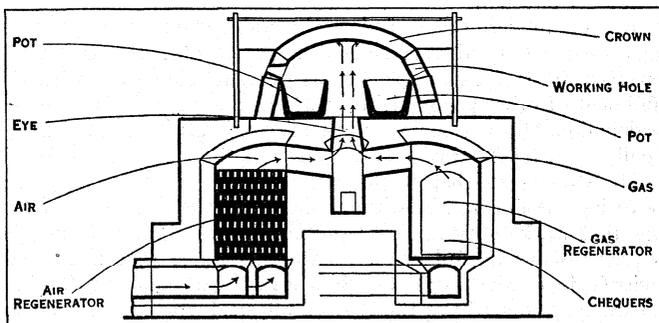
CROSS-SECTIONAL PLAN OF A REGENERATIVE FURNACE MELTING GLASS IN POTS
